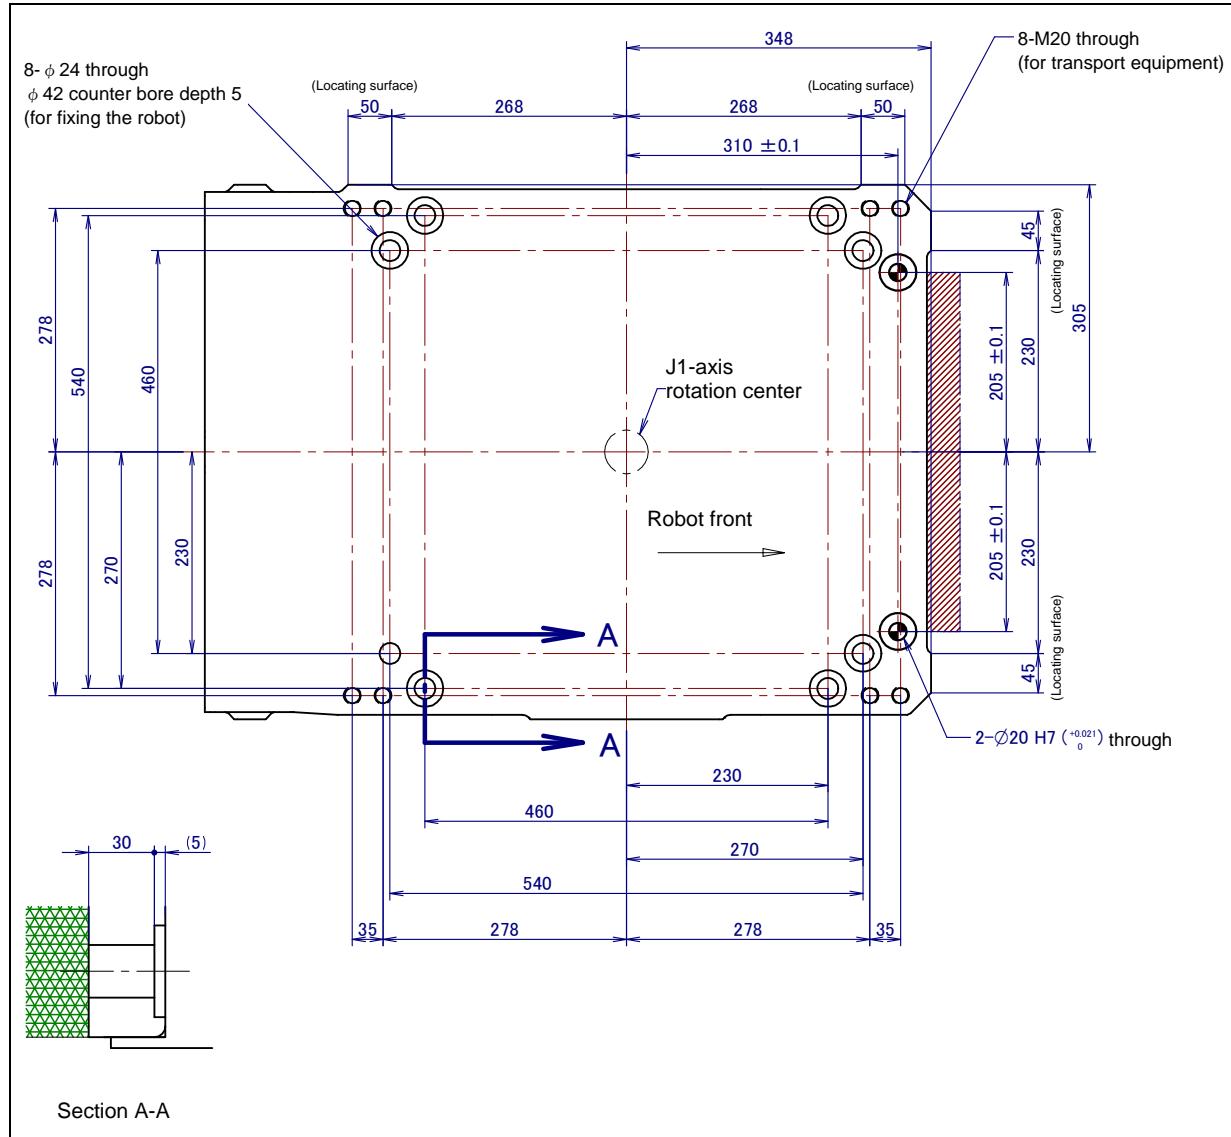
(b) Dimensions of the robot base (R-2000iC/270F/210L)
